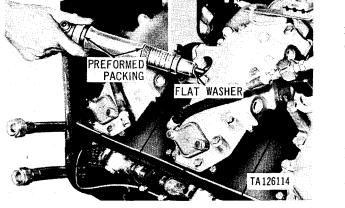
Removing or installing fuel injector nozzle and holder assembly.
